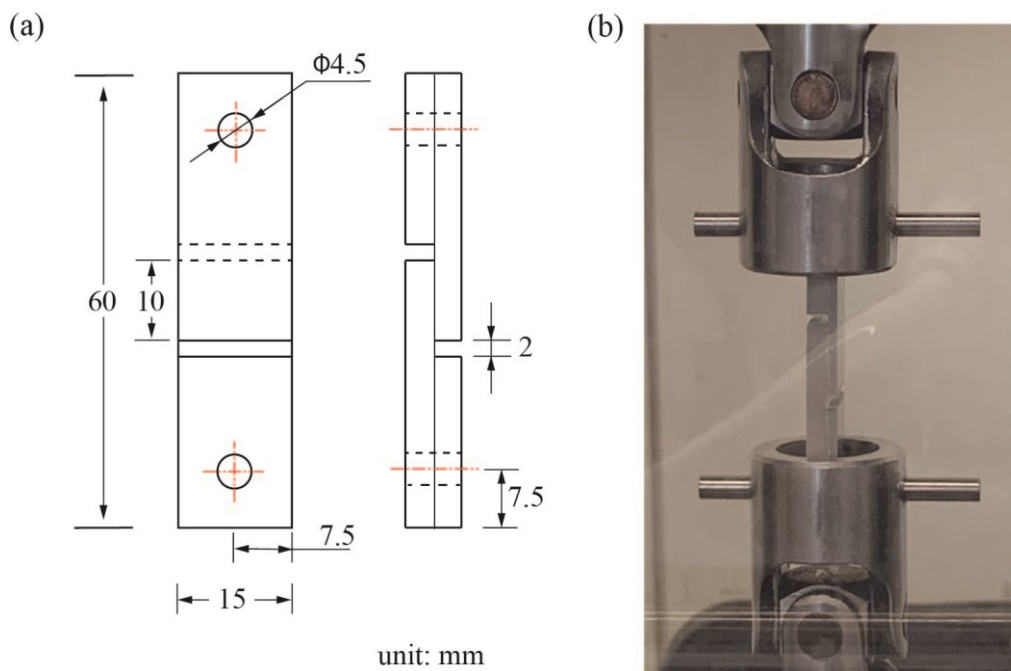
(a) Specimen dimensions for tensile shear test; (b) specimen under experiment
